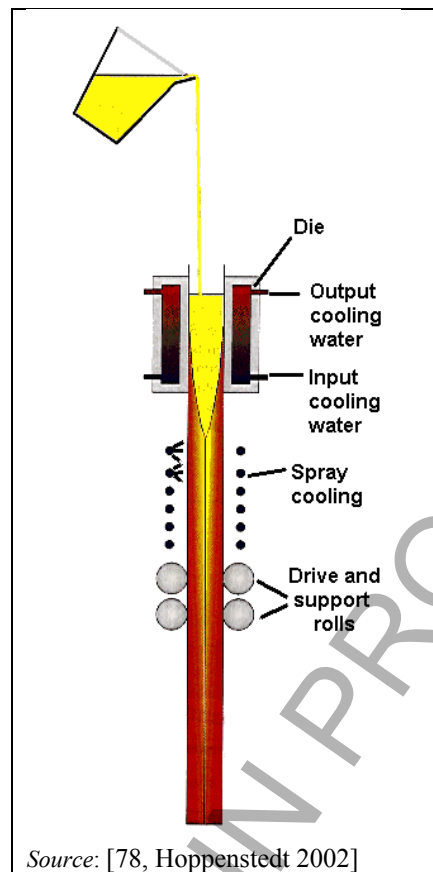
Schematic representation of a thread casting machine used for continuous casting
